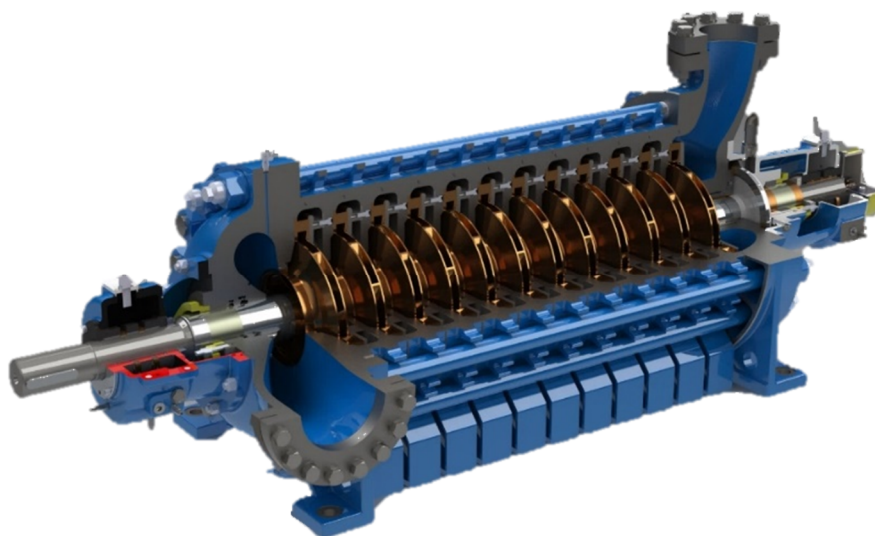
Section view of an impeller between-bearing type pump (BB4) multistage ring section pump with inline impeller configuration (courtesy of Scamont Engineering)
